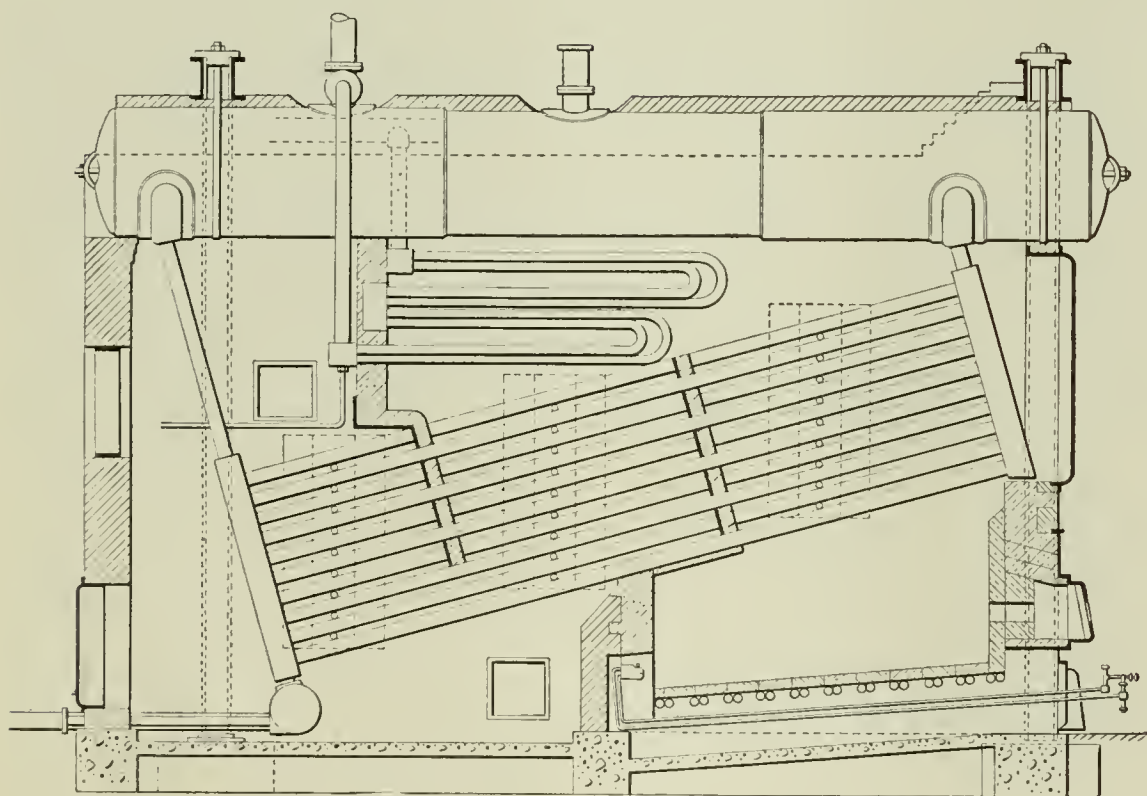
BOILER SHOWING ARRANGEMENT OF FURNACE
